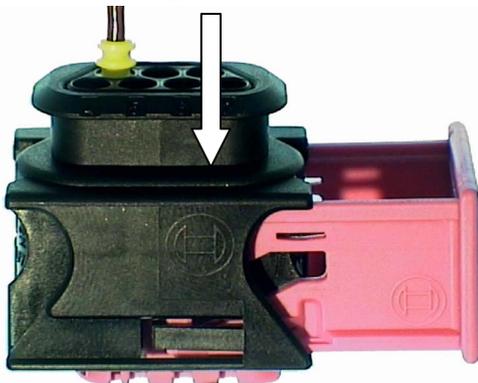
Terminal Assembly (Female Connector 7-way with slider)
